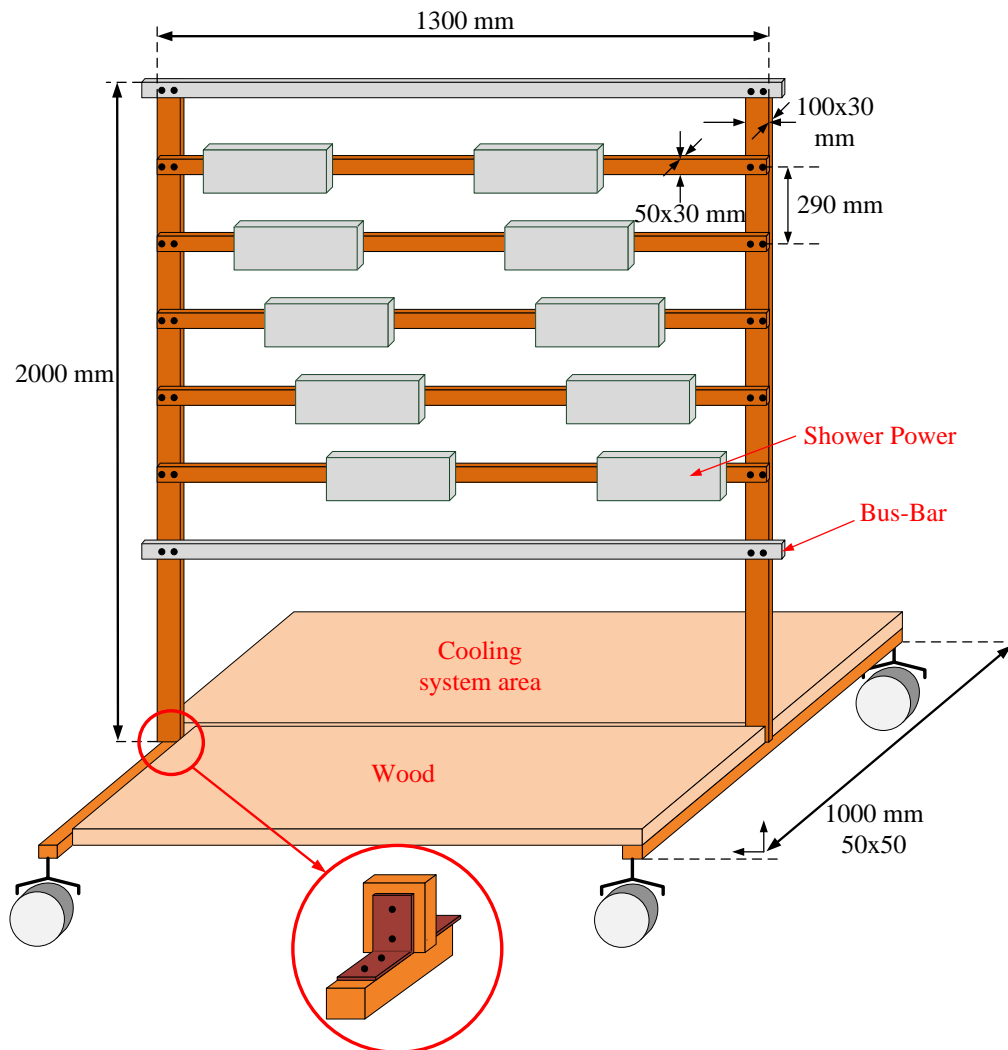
Testing IGBT power module chassis for an easy connection between their electrical and cooling parts
